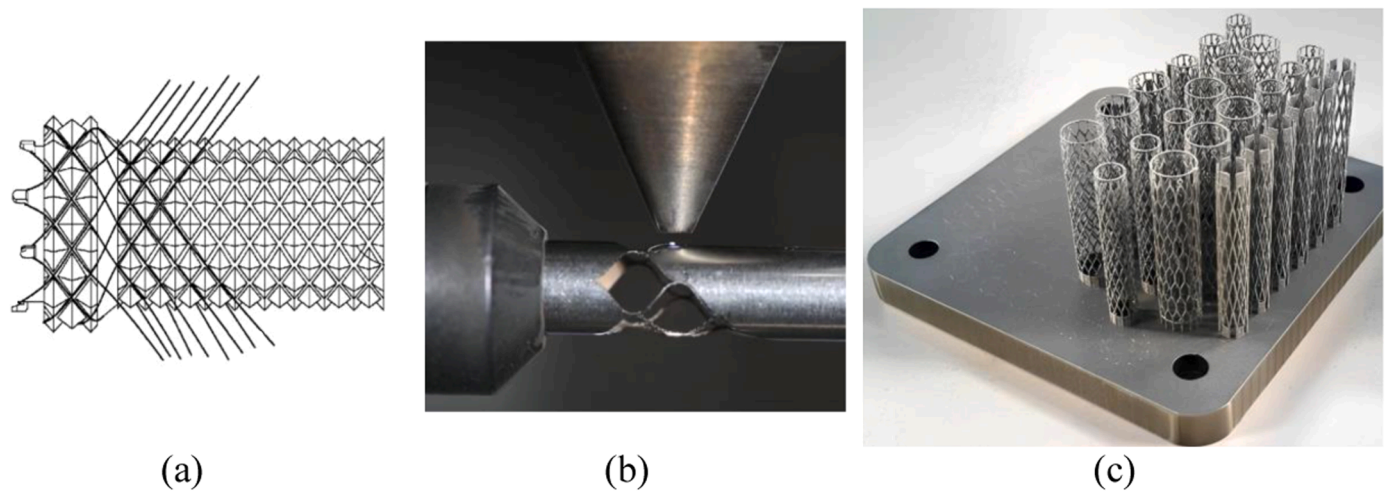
Manufacturing technique of stents: (a) braiding technique [44], (b) laser-cut technique [45], and (c) additive manufacturing (AM) [46].
